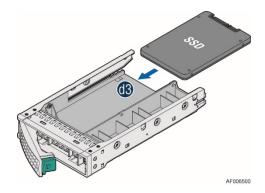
3.5" Drive Carrier Support 2.5" SSD
